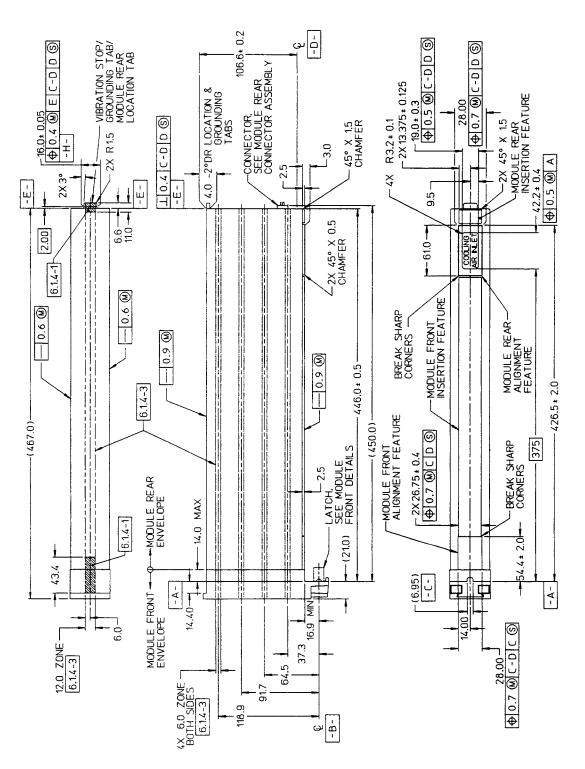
1 SLOT MODULE TOP, SIDE & BOTTOM DETAILS
